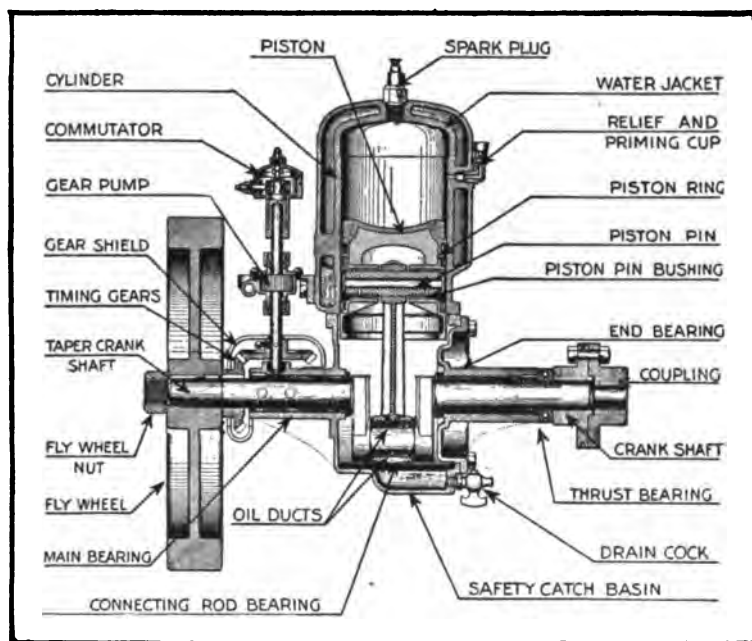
Part sectional view showing important details of the Gray Model R marine motor.
